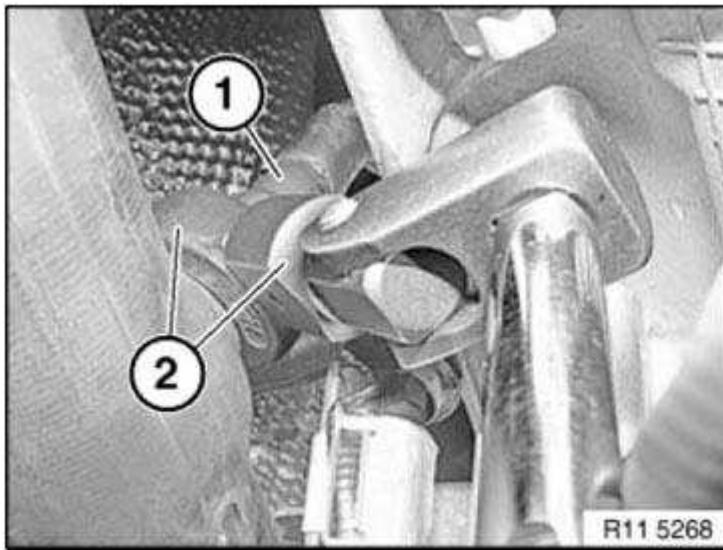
Removing Lambda Monitoring Sensor Plug Connection Using Special Tool (11 9 150)
